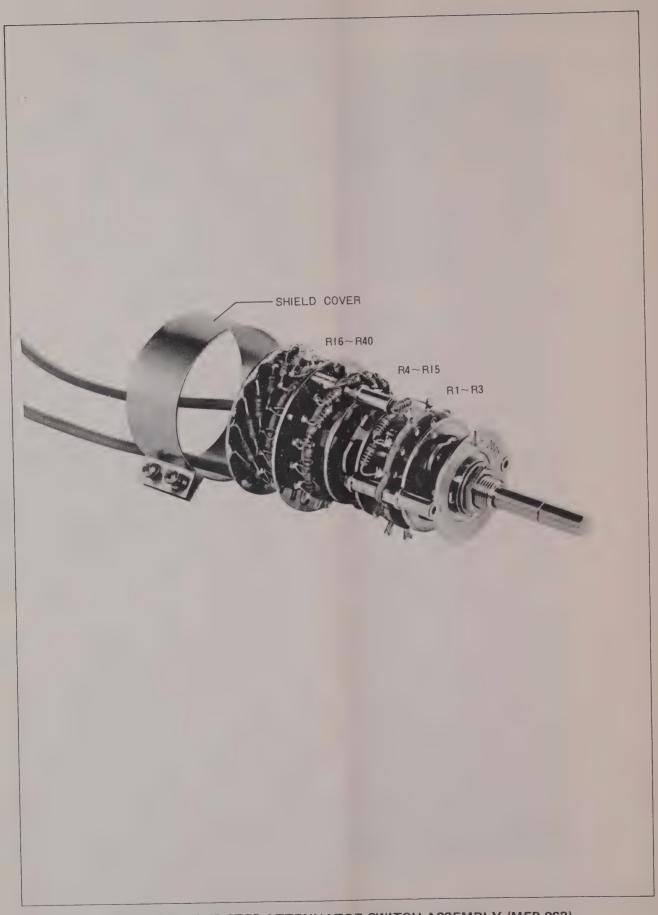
1 dB STEP ATTENUATOR SWITCH ASSEMBLY (MEP-263)
